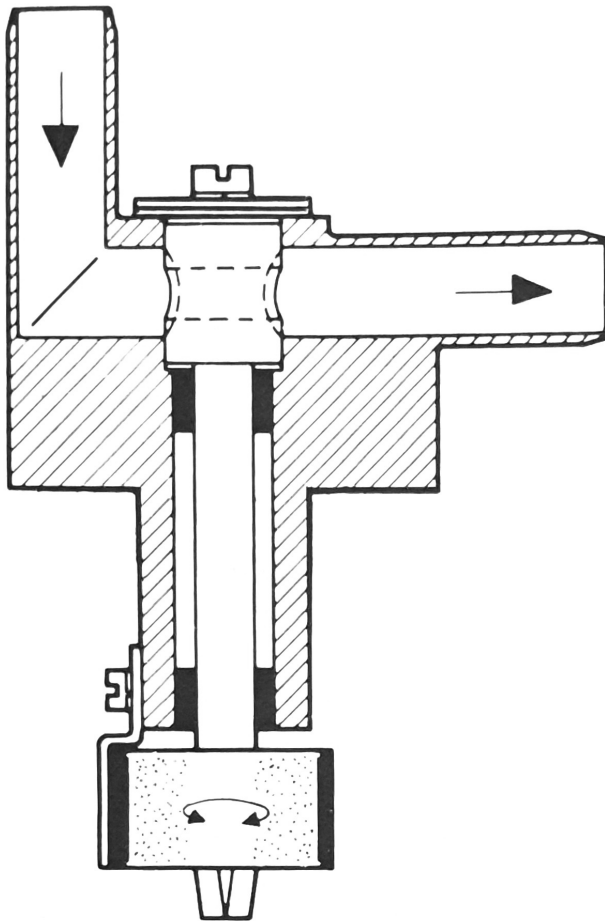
18 Sectioned view of the auxiliary air regulator valve
